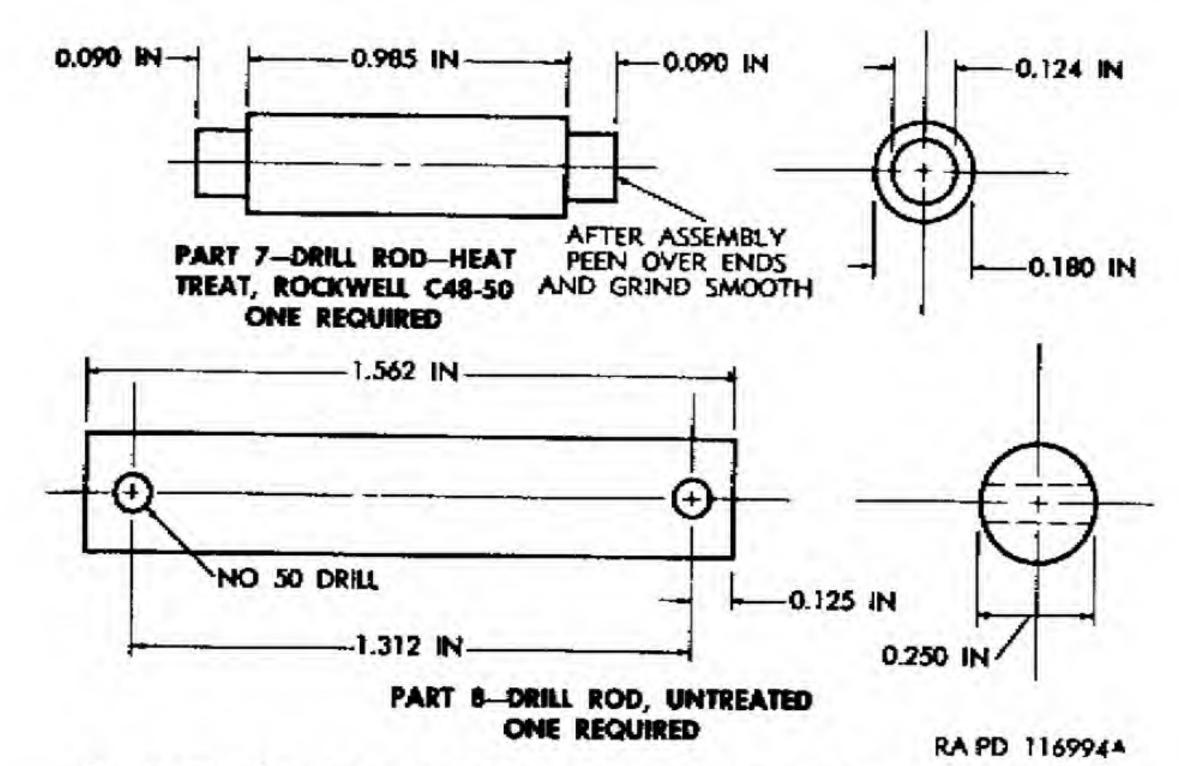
Detail of vise-held stamping fixture—part numbers 7 and 8.
